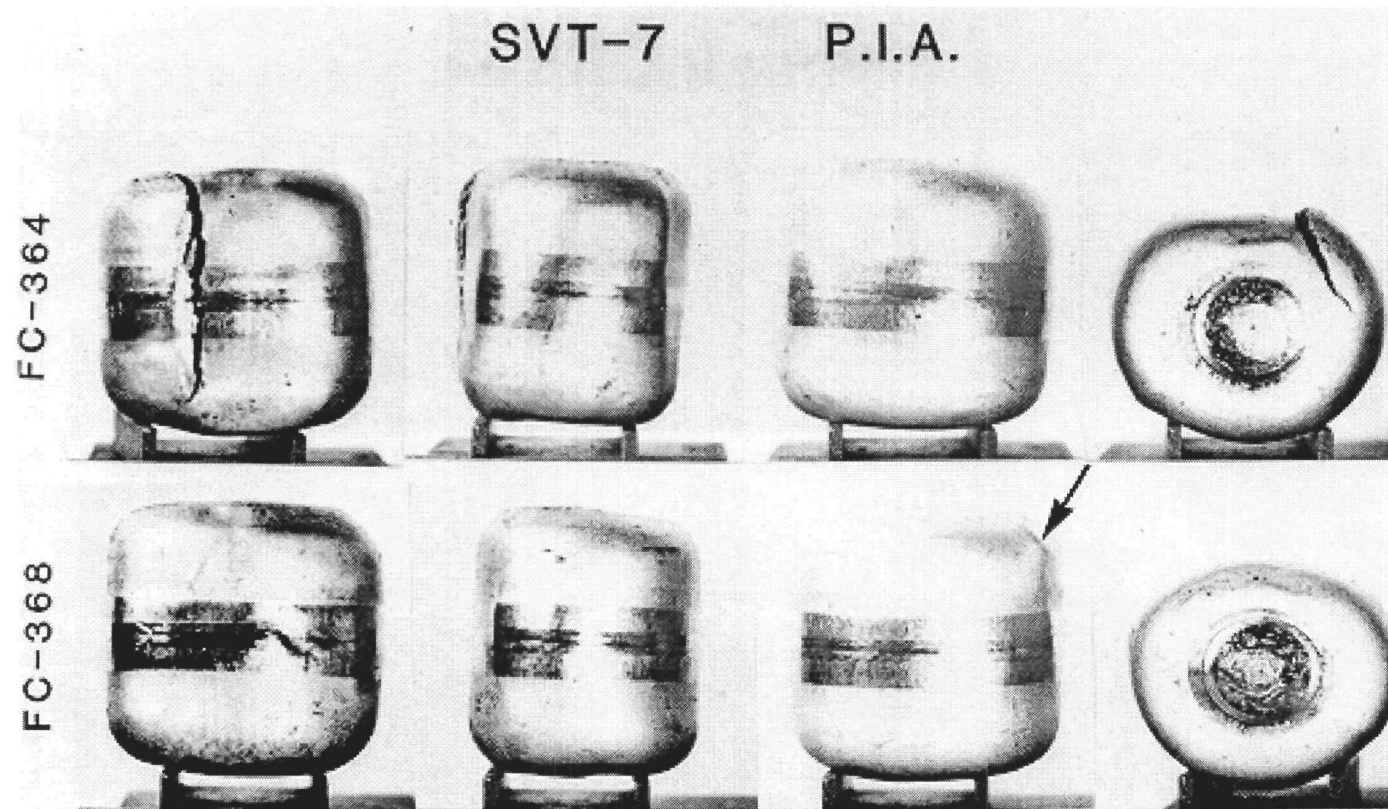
The impacted fueled clads of the primary impact assembly of SVT-7. A major fuel-fragment push-through failure occurred in FC-364, and a minor fracture in FC-368 (arrow) was observed. Left to right: impact face, side profile, back side, and vent-end profile.
